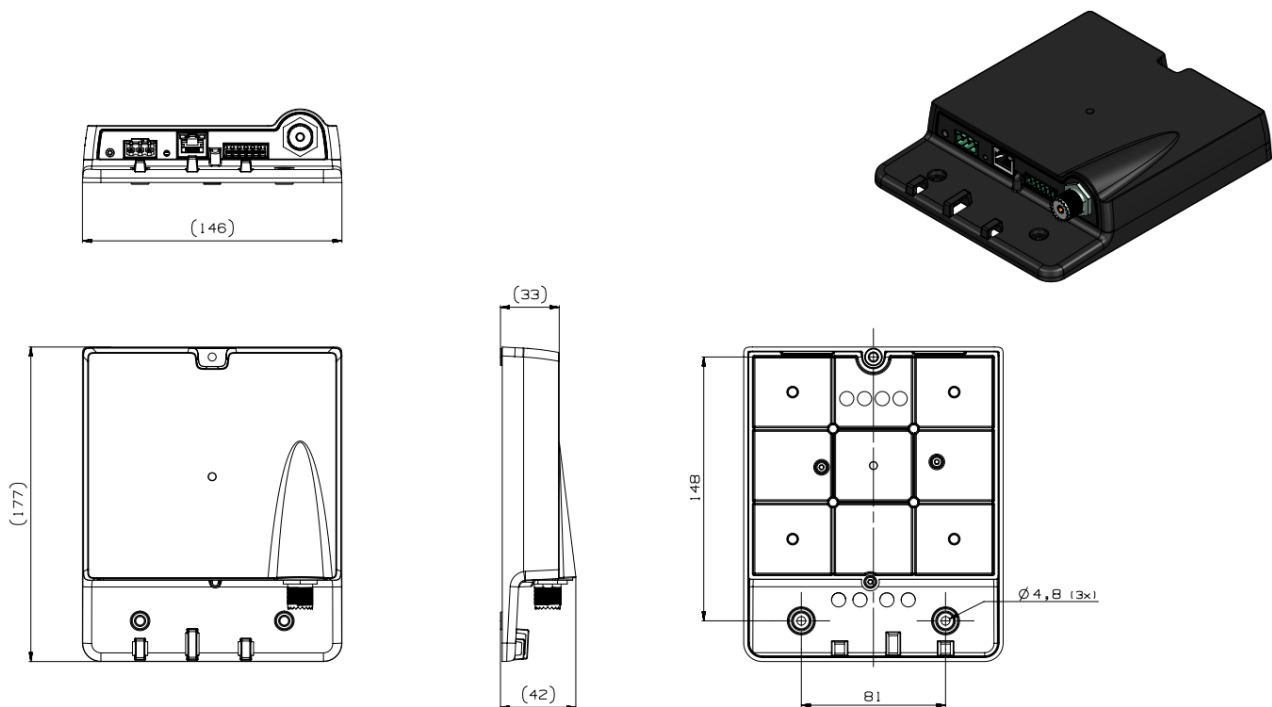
RA10 dimensions (all dimensions in millimeters)
